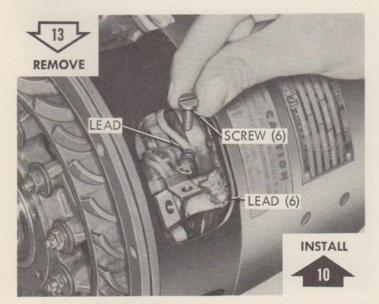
DISASSEMBLING OR ASSEMBLING GENERATOR (continued to fig. 40).
